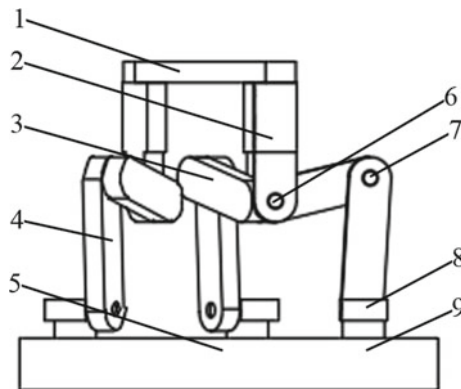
Structure of the 3-RRR parallel mechanism (1—Top triangular static platform; 2—Support arm *a*; 3—Support arm *b*; 4—Support arm *c*; 5—Circular static plat pedestal; 6—Motor *a*1; 7—Motor *a*2; 8—Motor *a*3; 9—Motor *a*4)
